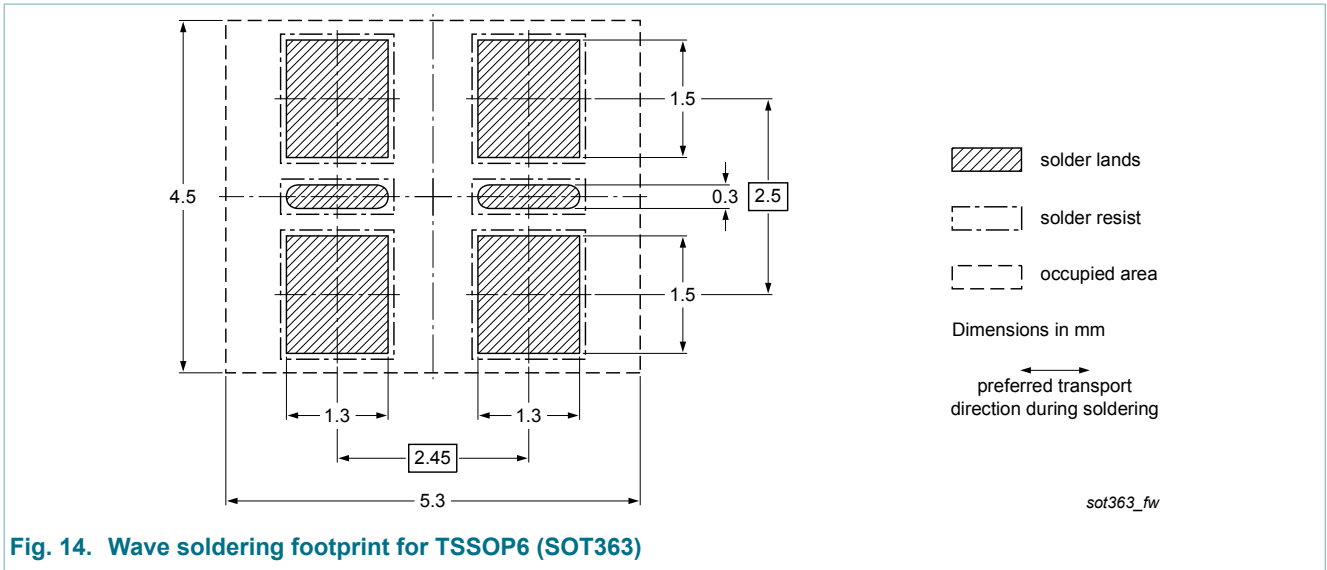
Wave soldering footprint for TSSOP6 (SOT363)
